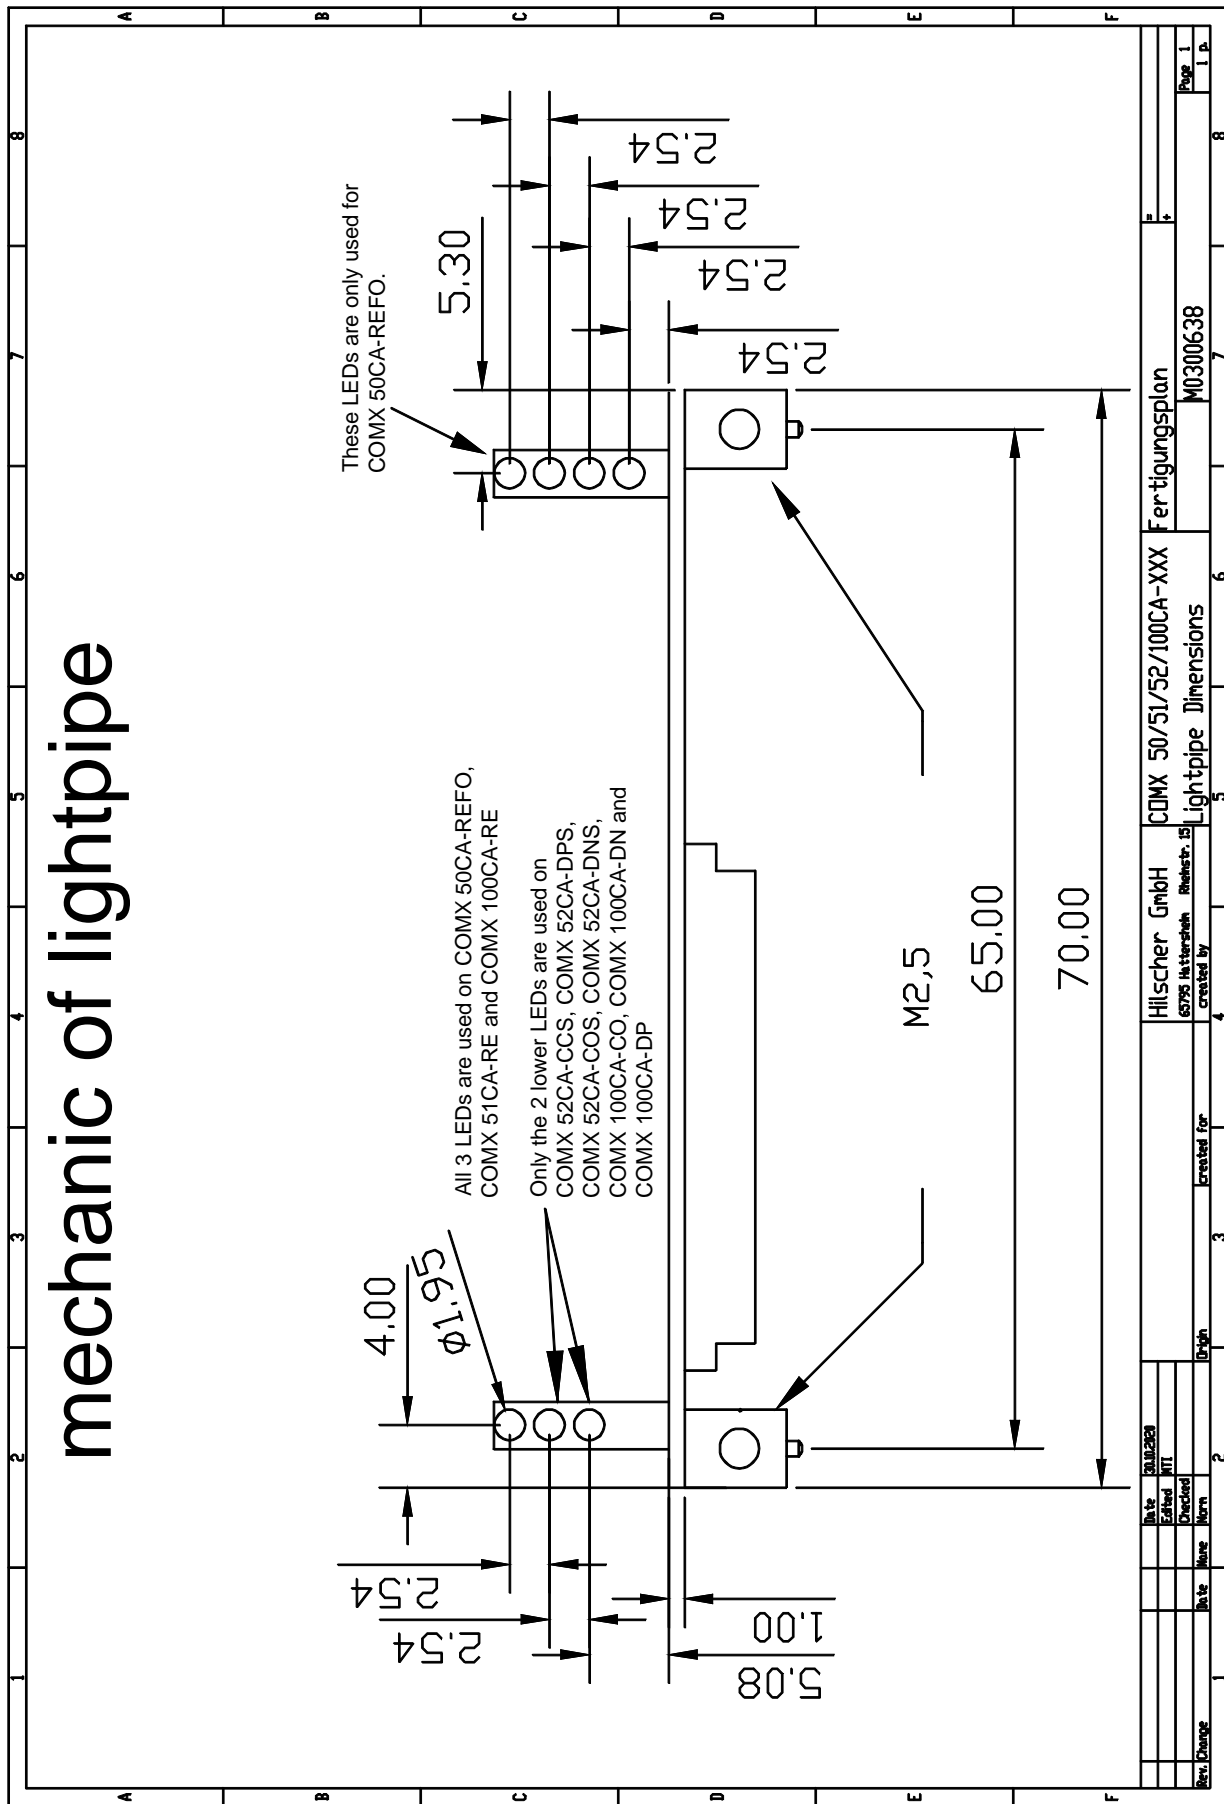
Mechanical dimension of light pipe of COMX 51/52/100CA-XXX
